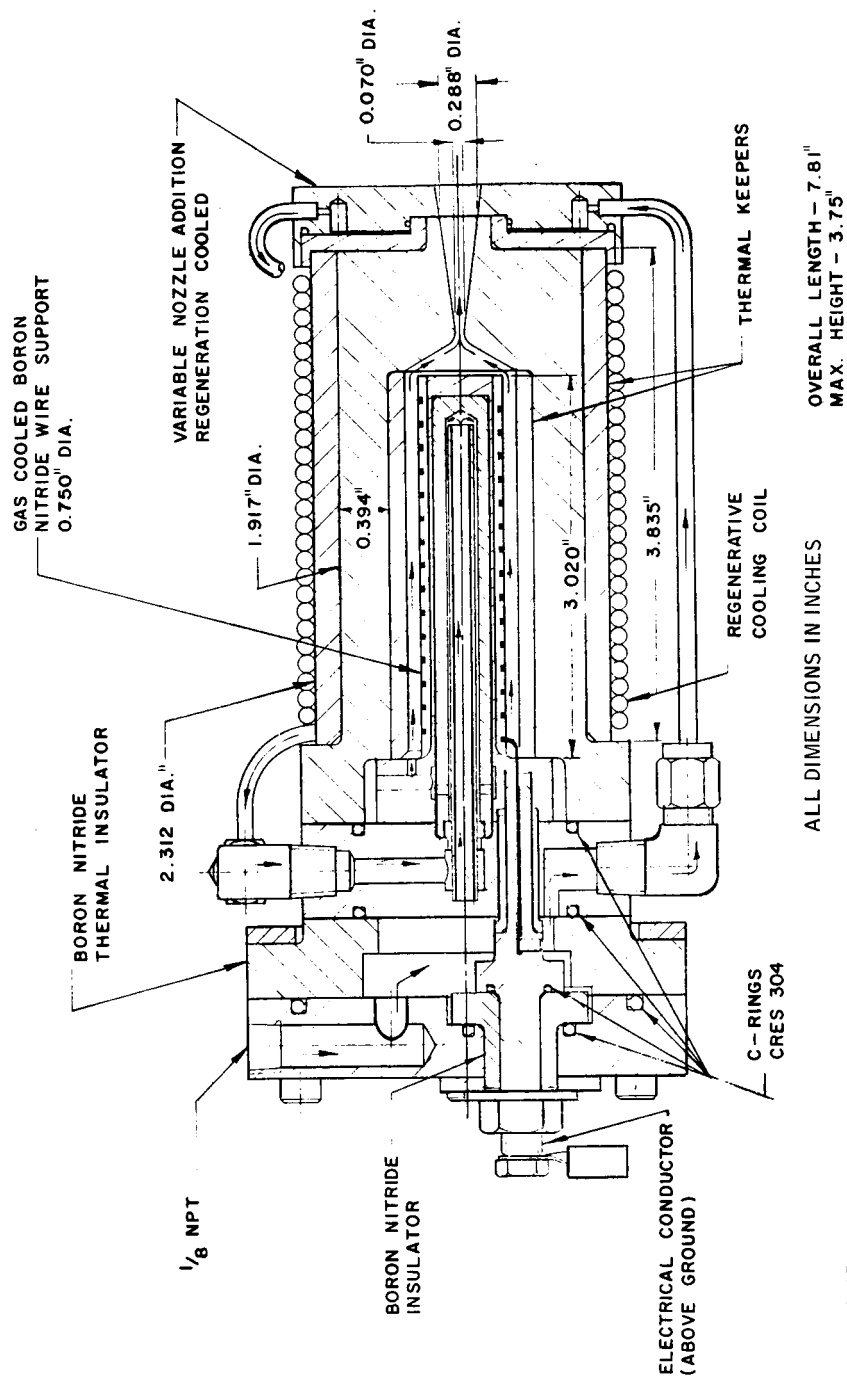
MARK II, MOD 2 THRUSTOR, ASSEMBLED
